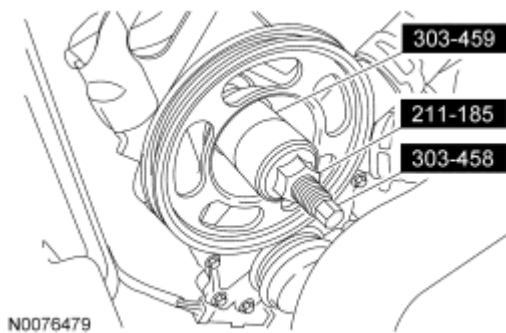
Installing Coolant Pump Pulley Using Special Tools (211-185, 303-458, 303-459)
